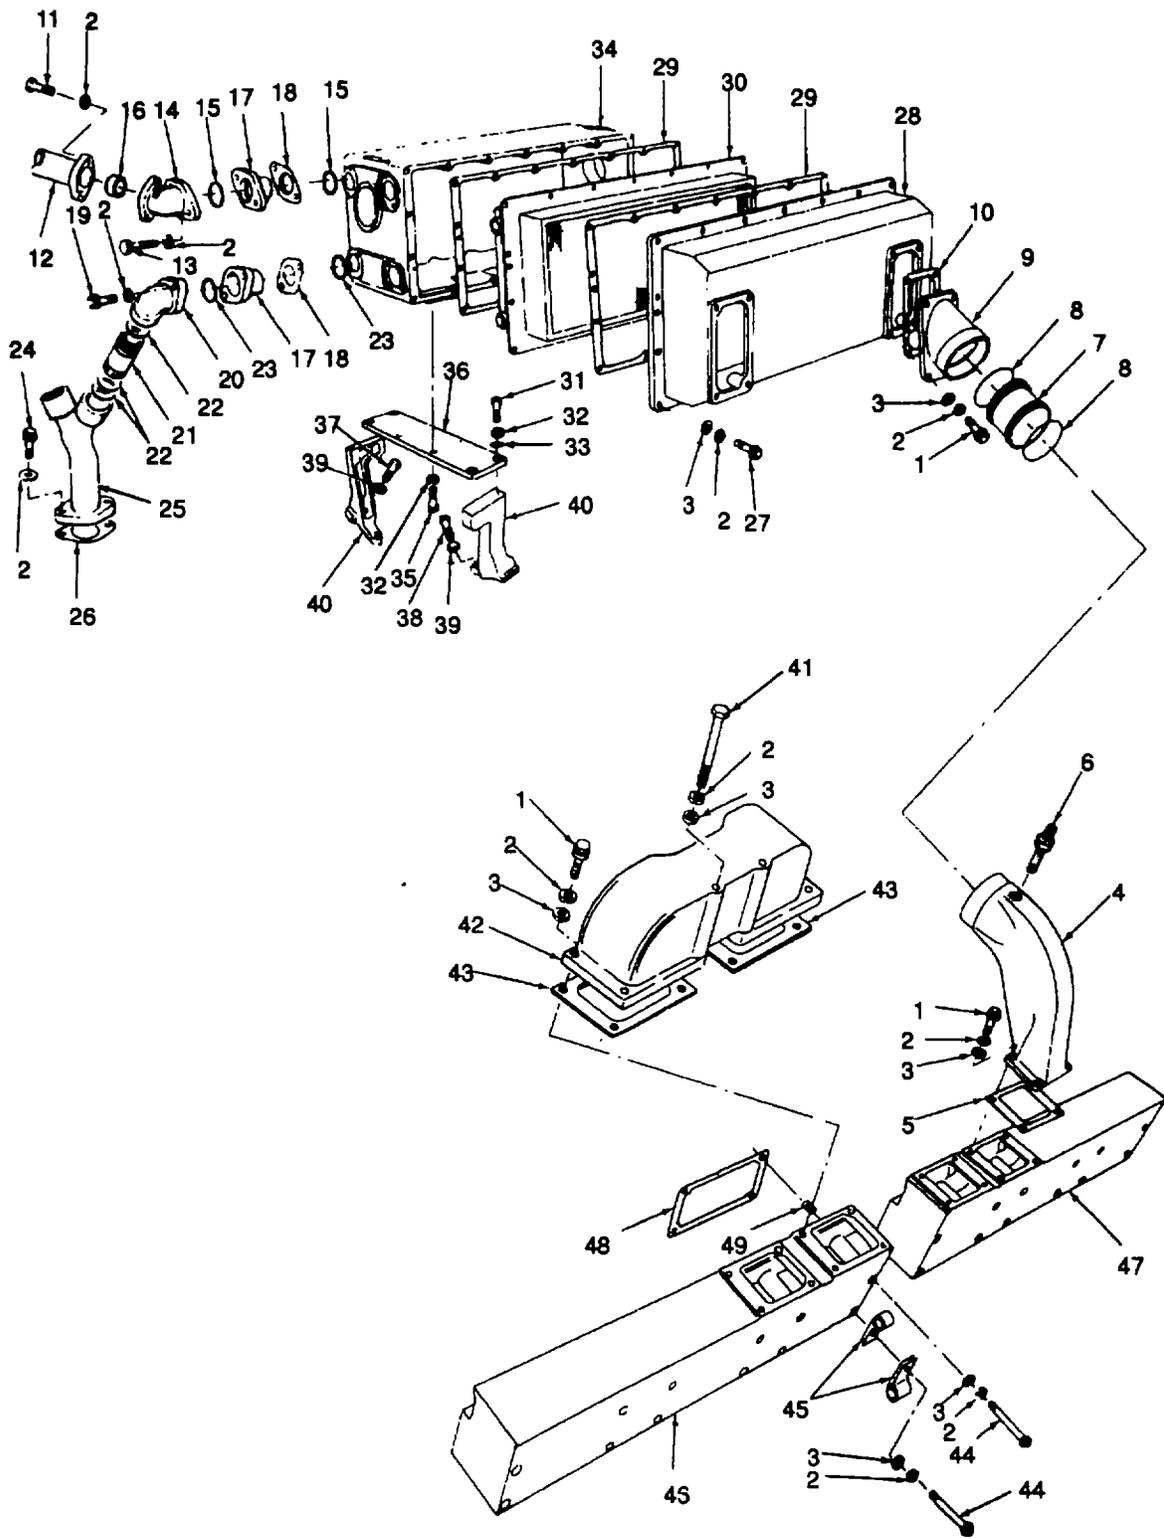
Aftercooler and Intake Manifolds (Sheet 1 of 2)
